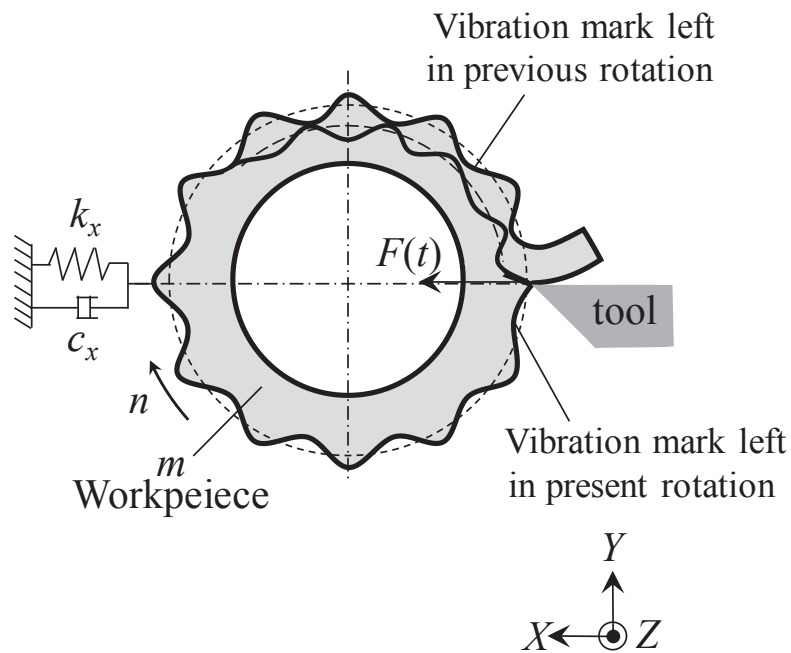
Vibration model in turning of thin-tubular workpiece [54].
